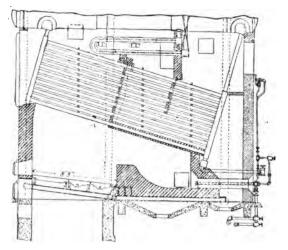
Water tube boiler, with setting rebuilt for back-end oil firing.
